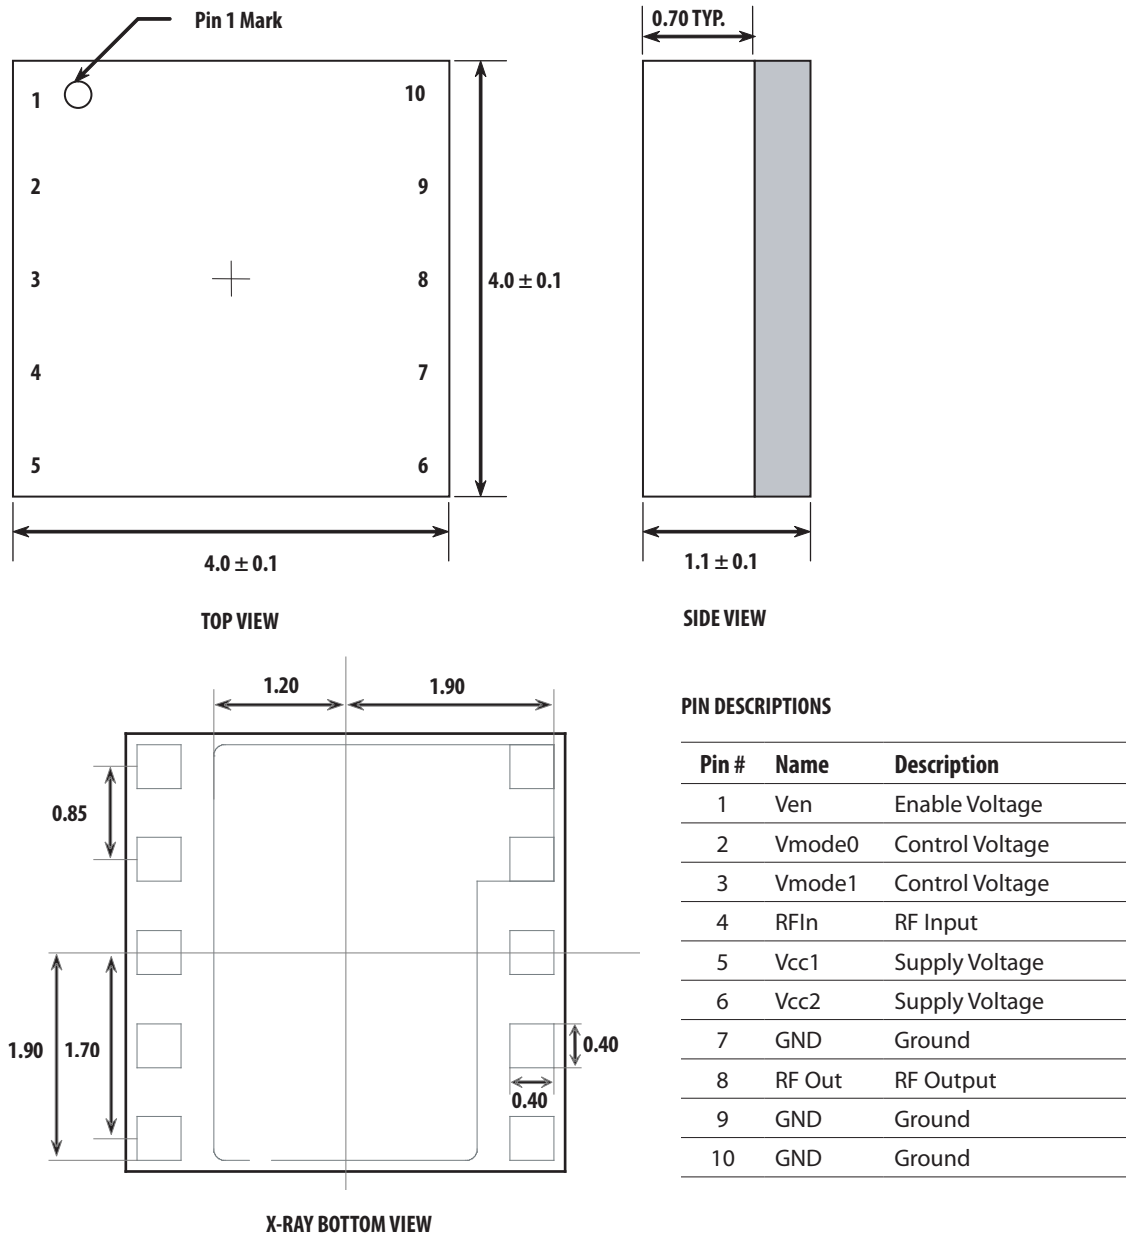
Package Dimensional Drawing and Pin Descriptions (All dimensions are in millimeters)
